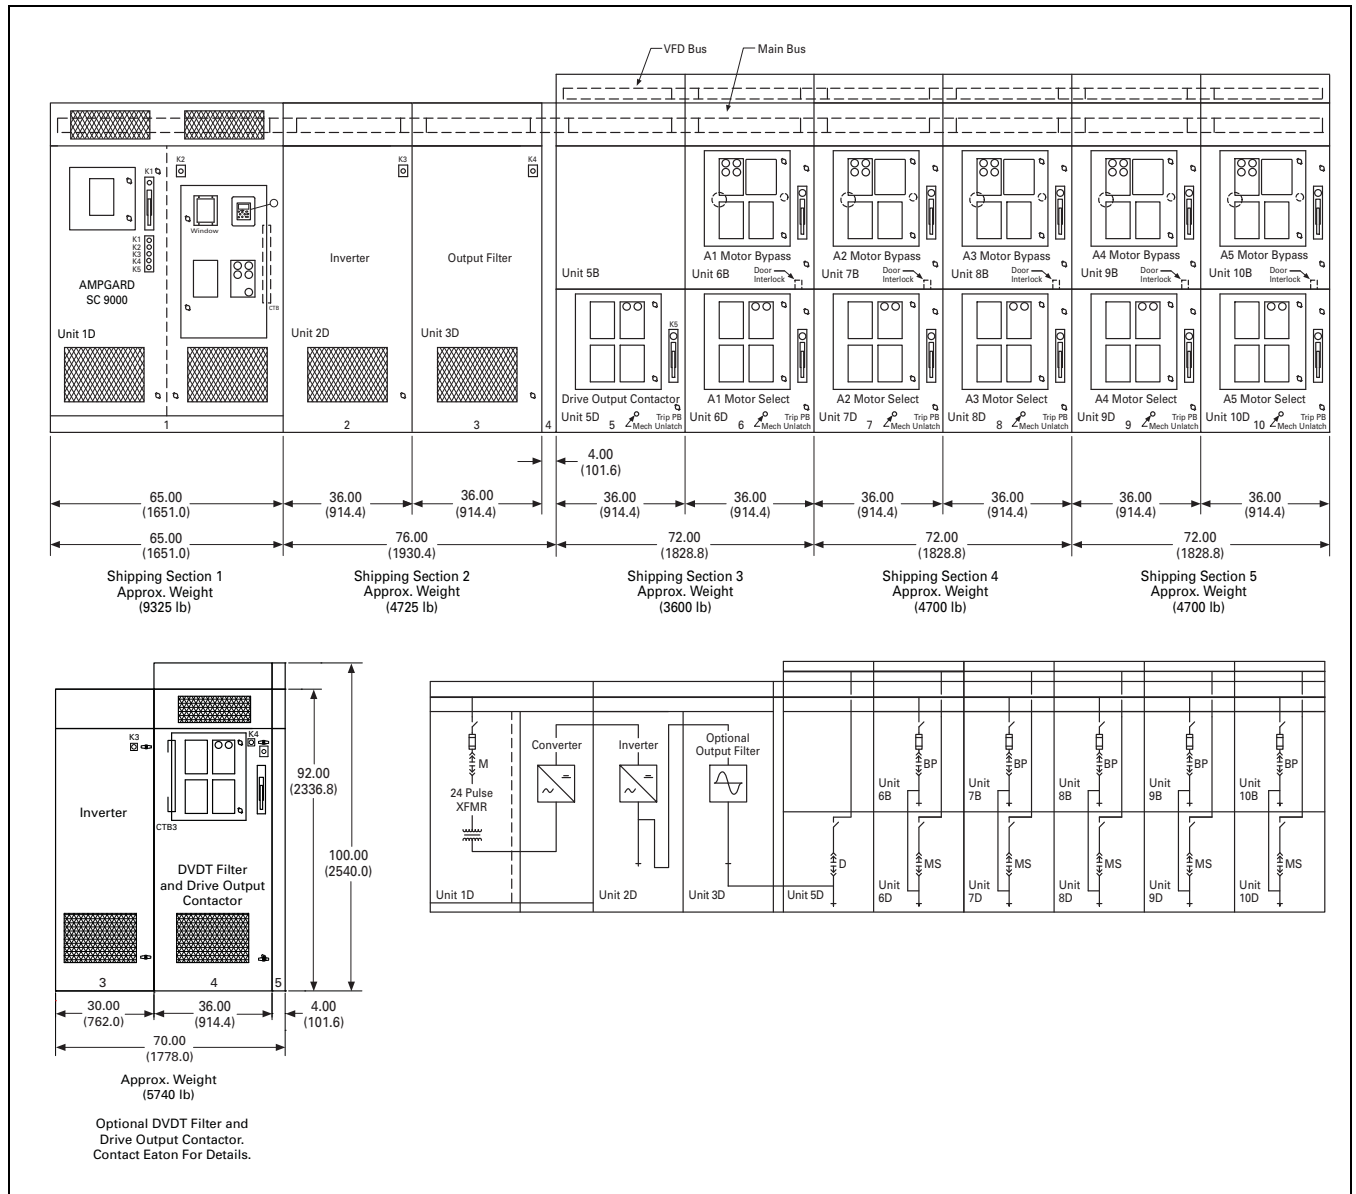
SC9000 EP AFD Output Filter Maximum Dimensions and Incoming Line Layouts—Dimensions in Inches (mm)
